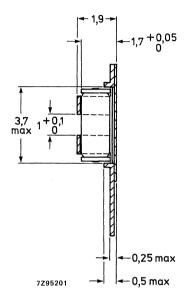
Cross-sectional view of bandolier with SOD-80 devices.
